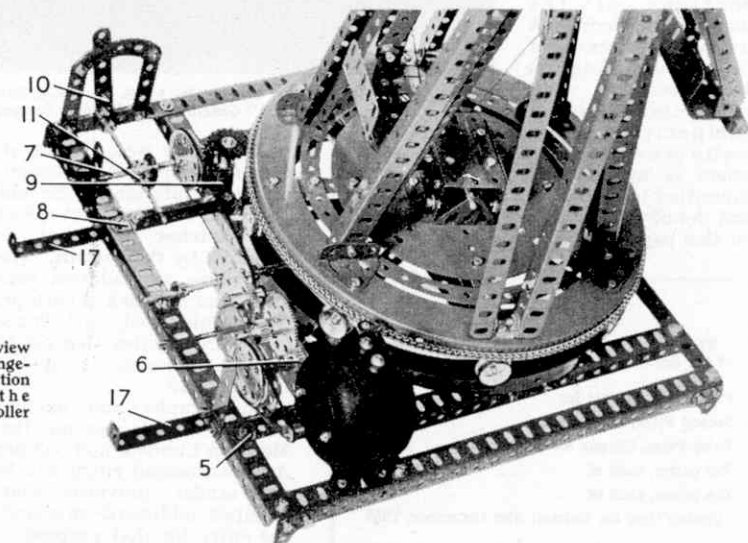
This view shows the arrangement of the friction clutch and the drive to the roller bearing.
